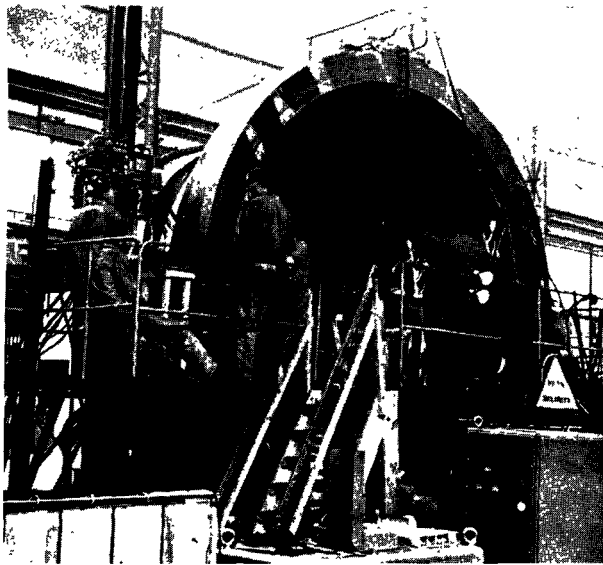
Location of welding parts before automatic electroslag welding
